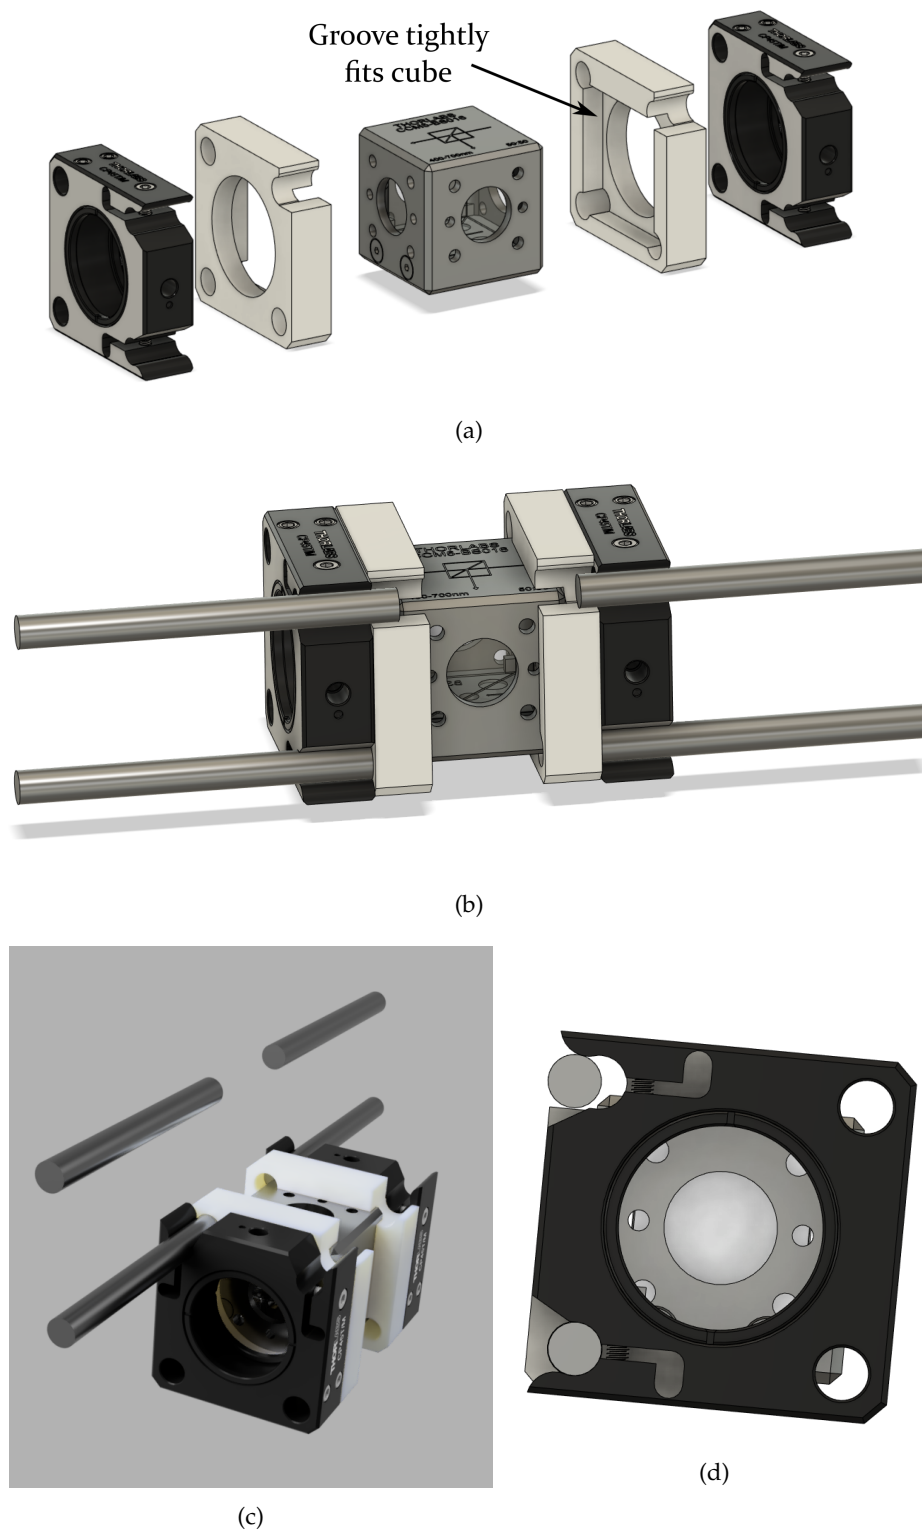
CAD drawings of a proof-of-concept swing adapter for the 50:50 mirror cubes: (a) exploded view, (b) attached to cage-rods, (c) render with the mirrors rotated off-axis, (d) side-view showing how the housing of the 50:50 cubes occlude the cage-rod holes.
